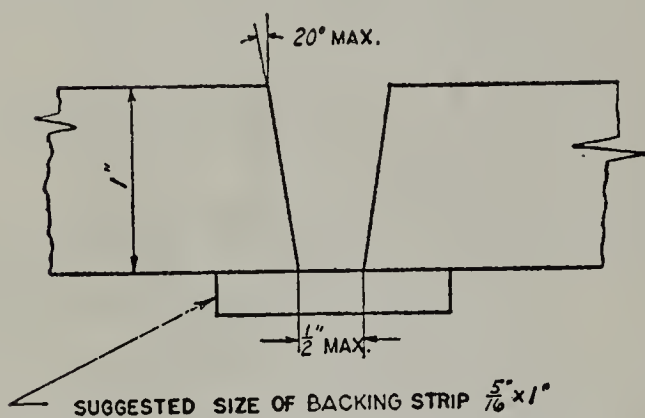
(a)—Butt Joint for Plate 1 In. Thick.
